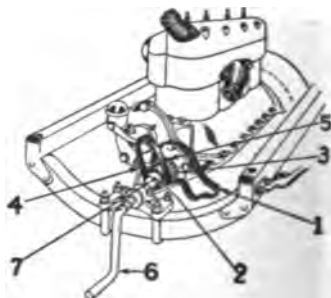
Installing crankshaft sprocket, silent chain and fan belt in mounting Gray & Davis
